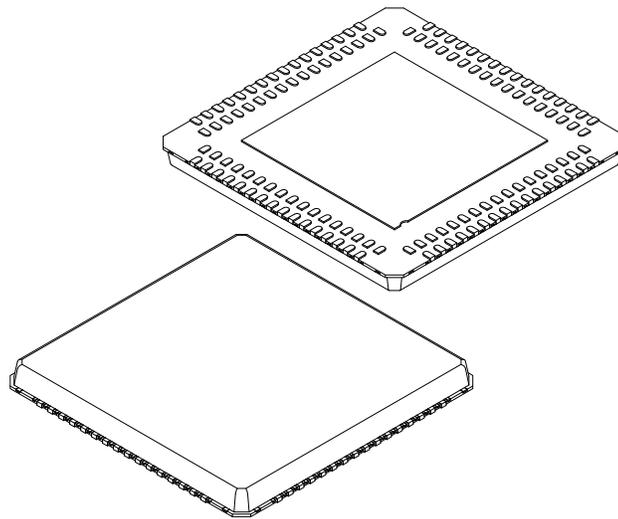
132-VQFN-DR PACKAGE (DRAWING)
